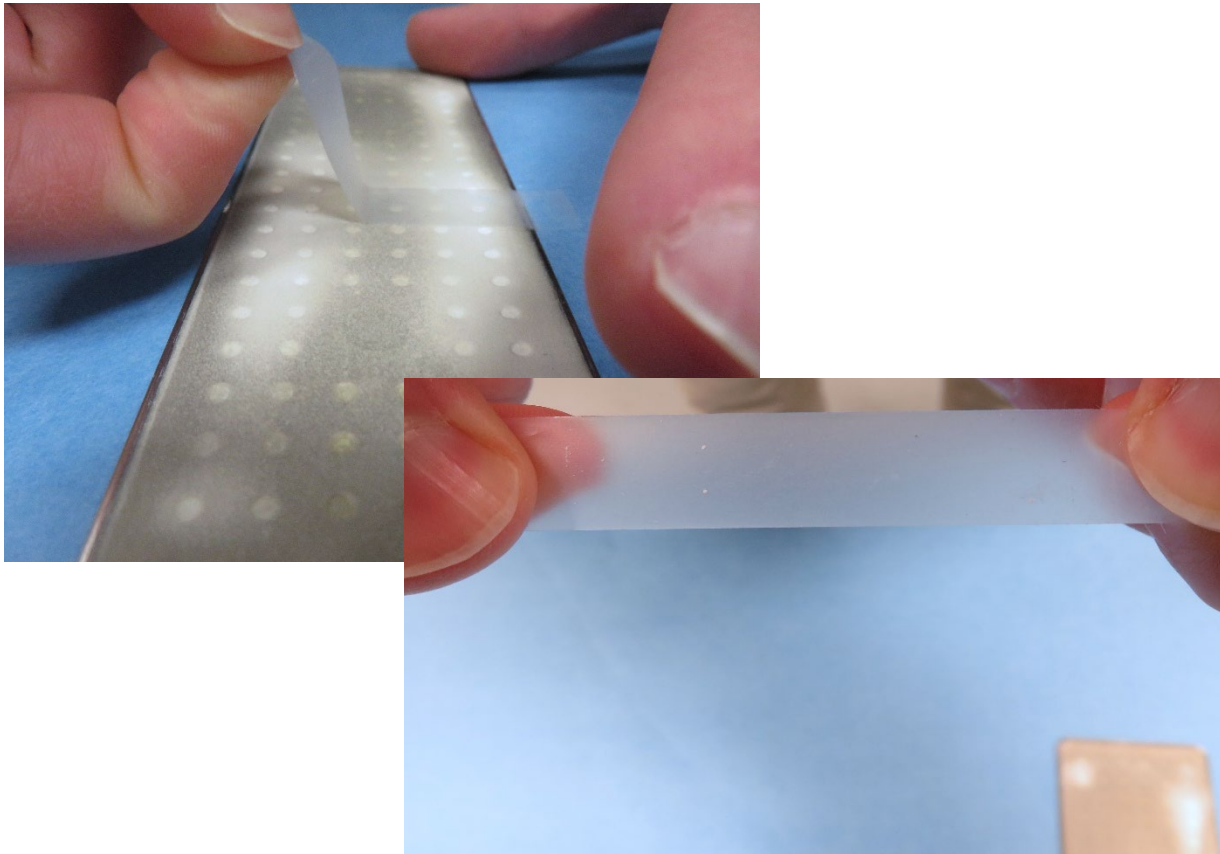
Initial Coating Adhesion Trial Results of a Weldable Sample (left) and a Flat Plate Sample (right).
